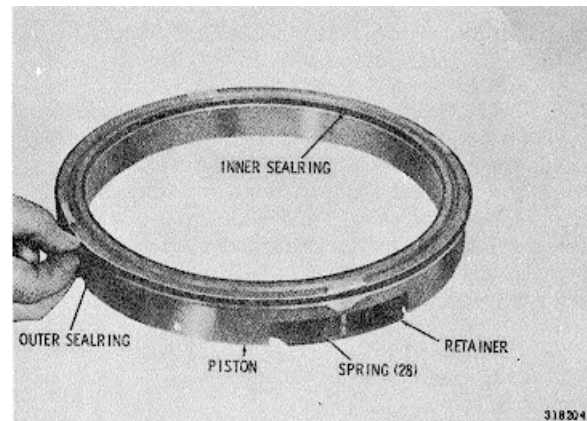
Removing (or installing) first clutch piston seal ring
